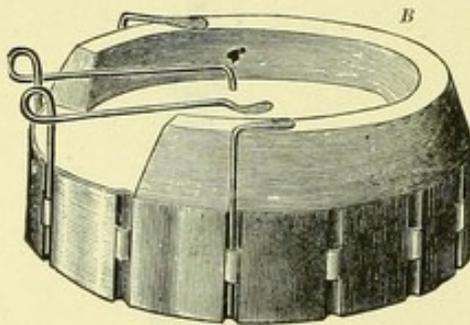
DR. MELOTTE'S SOLDERING OUTFIT.
